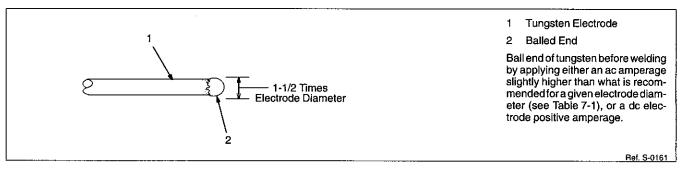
Preparing Tungsten For AC Or DC Electrode Positive (DCEP) Welding
